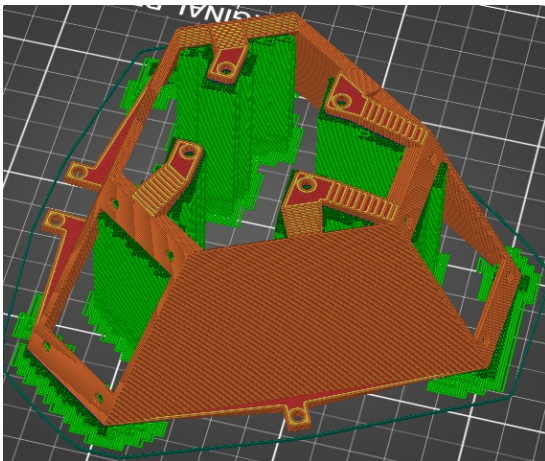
Preview of model for 3D printing of the PCBs mount
